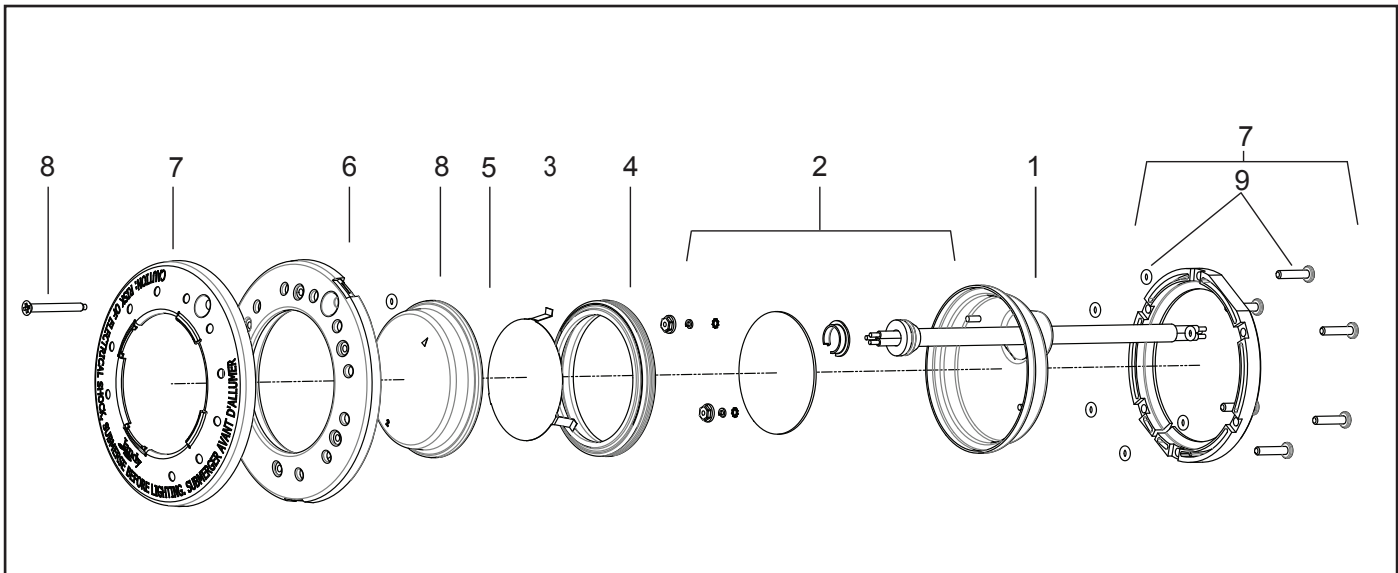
Jandy Pro Series Small White 12V LED Light Exploded View
